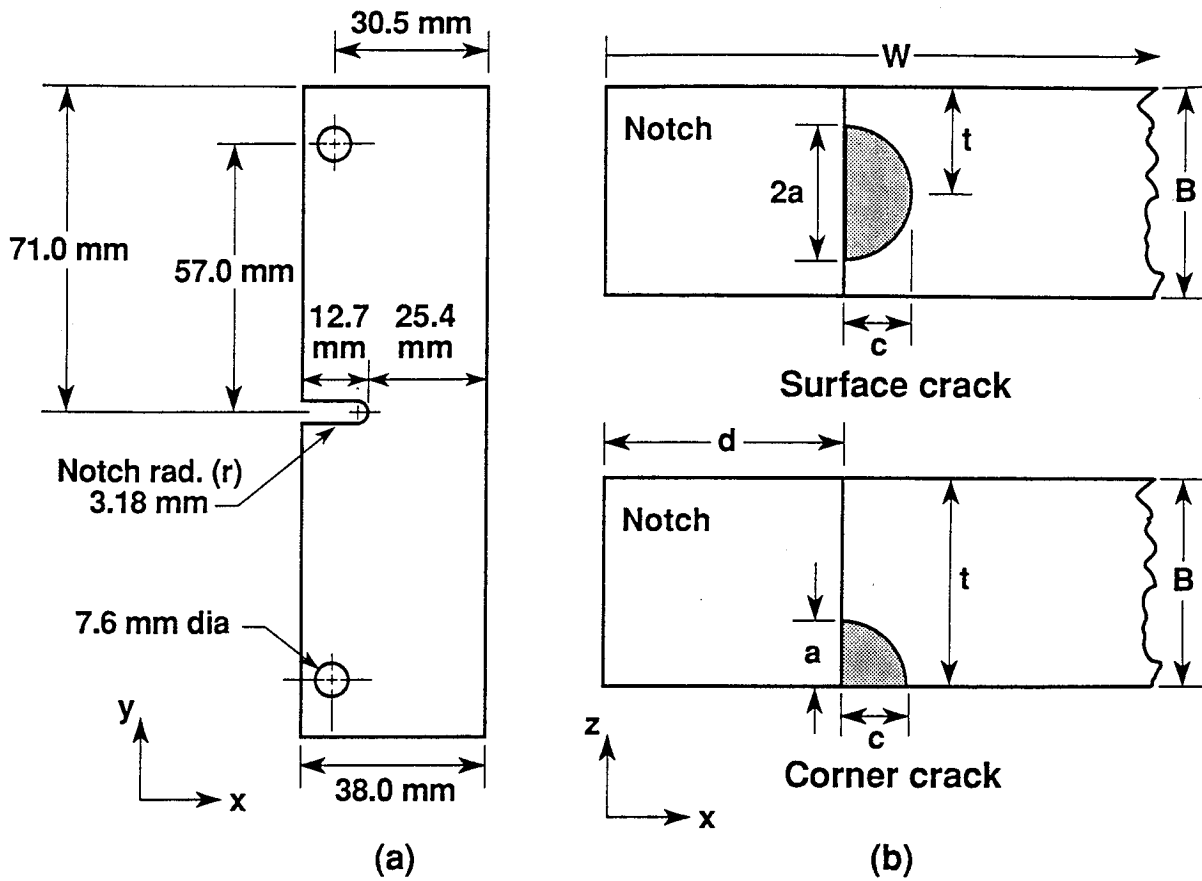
A schematic of, (a) the blunt notch extended compact tension specimen and (b) the surface and corner crack geometry.
